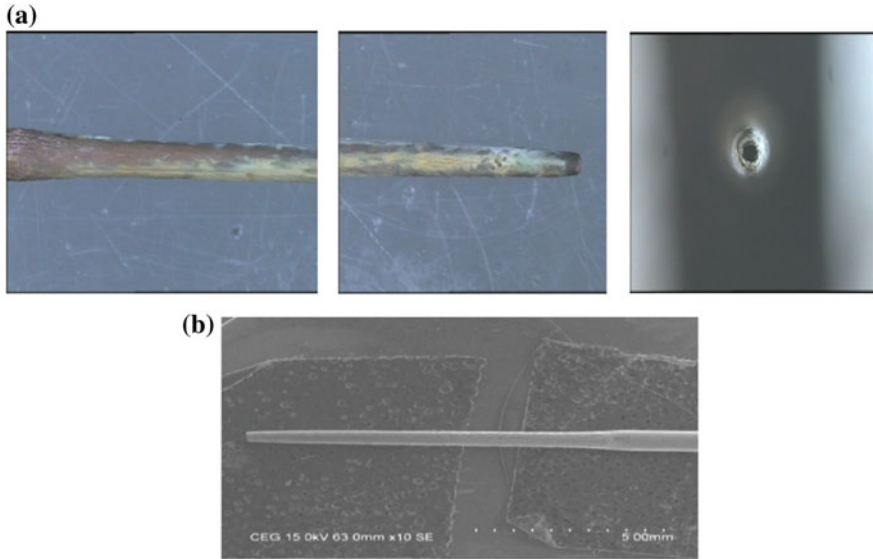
a VMS image of copper tube with reciprocating feed. b SEM image of the fabricated hollow conical tool
